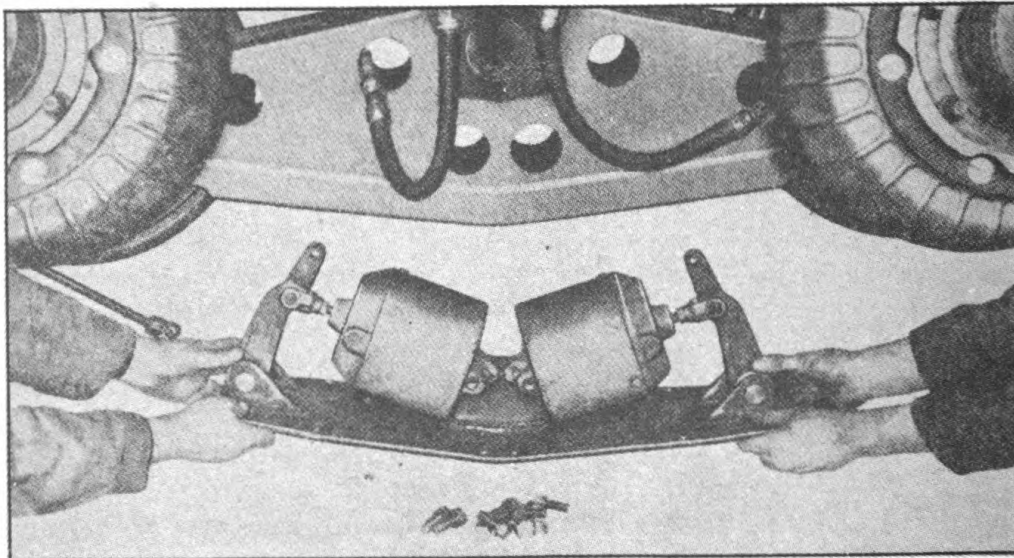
LOWERING BRAKE MOUNTING PLATE
